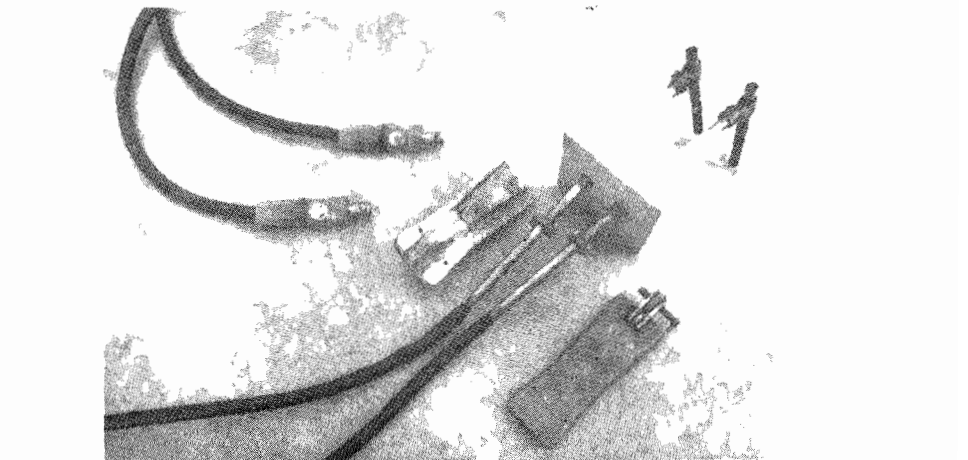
Twin carbon-arc torch disassembled. Basic materials used for parts are 25 mm² multi-strand copper cable, 10 mm in diameter copper tubing, brass rod, asbestos sheet, plastic sheet, and carbon electrodes.
